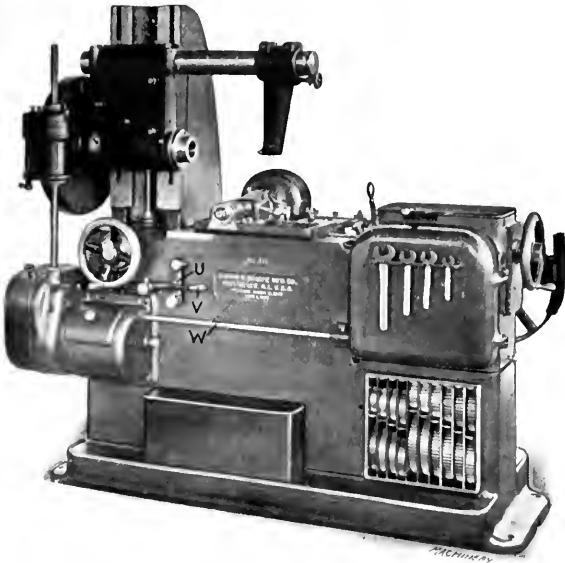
Front View of Brown & Sharpe No. 3-H Gear Cutting Machine
